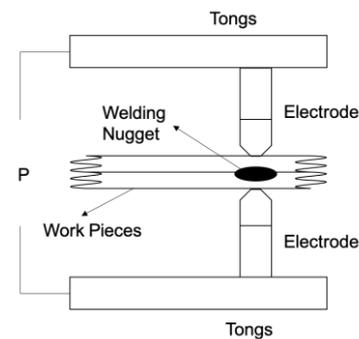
Resistance Spot Welding Machine with Workpiece
